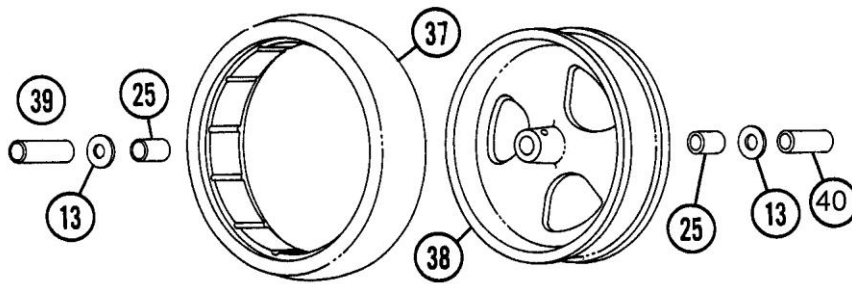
Packwheel Mounting Parts for Ball Bearings
